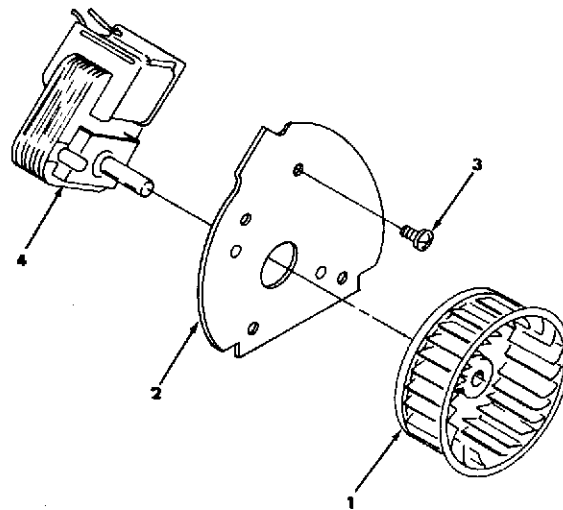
MOTOR AND PLATE ASSEMBLY
